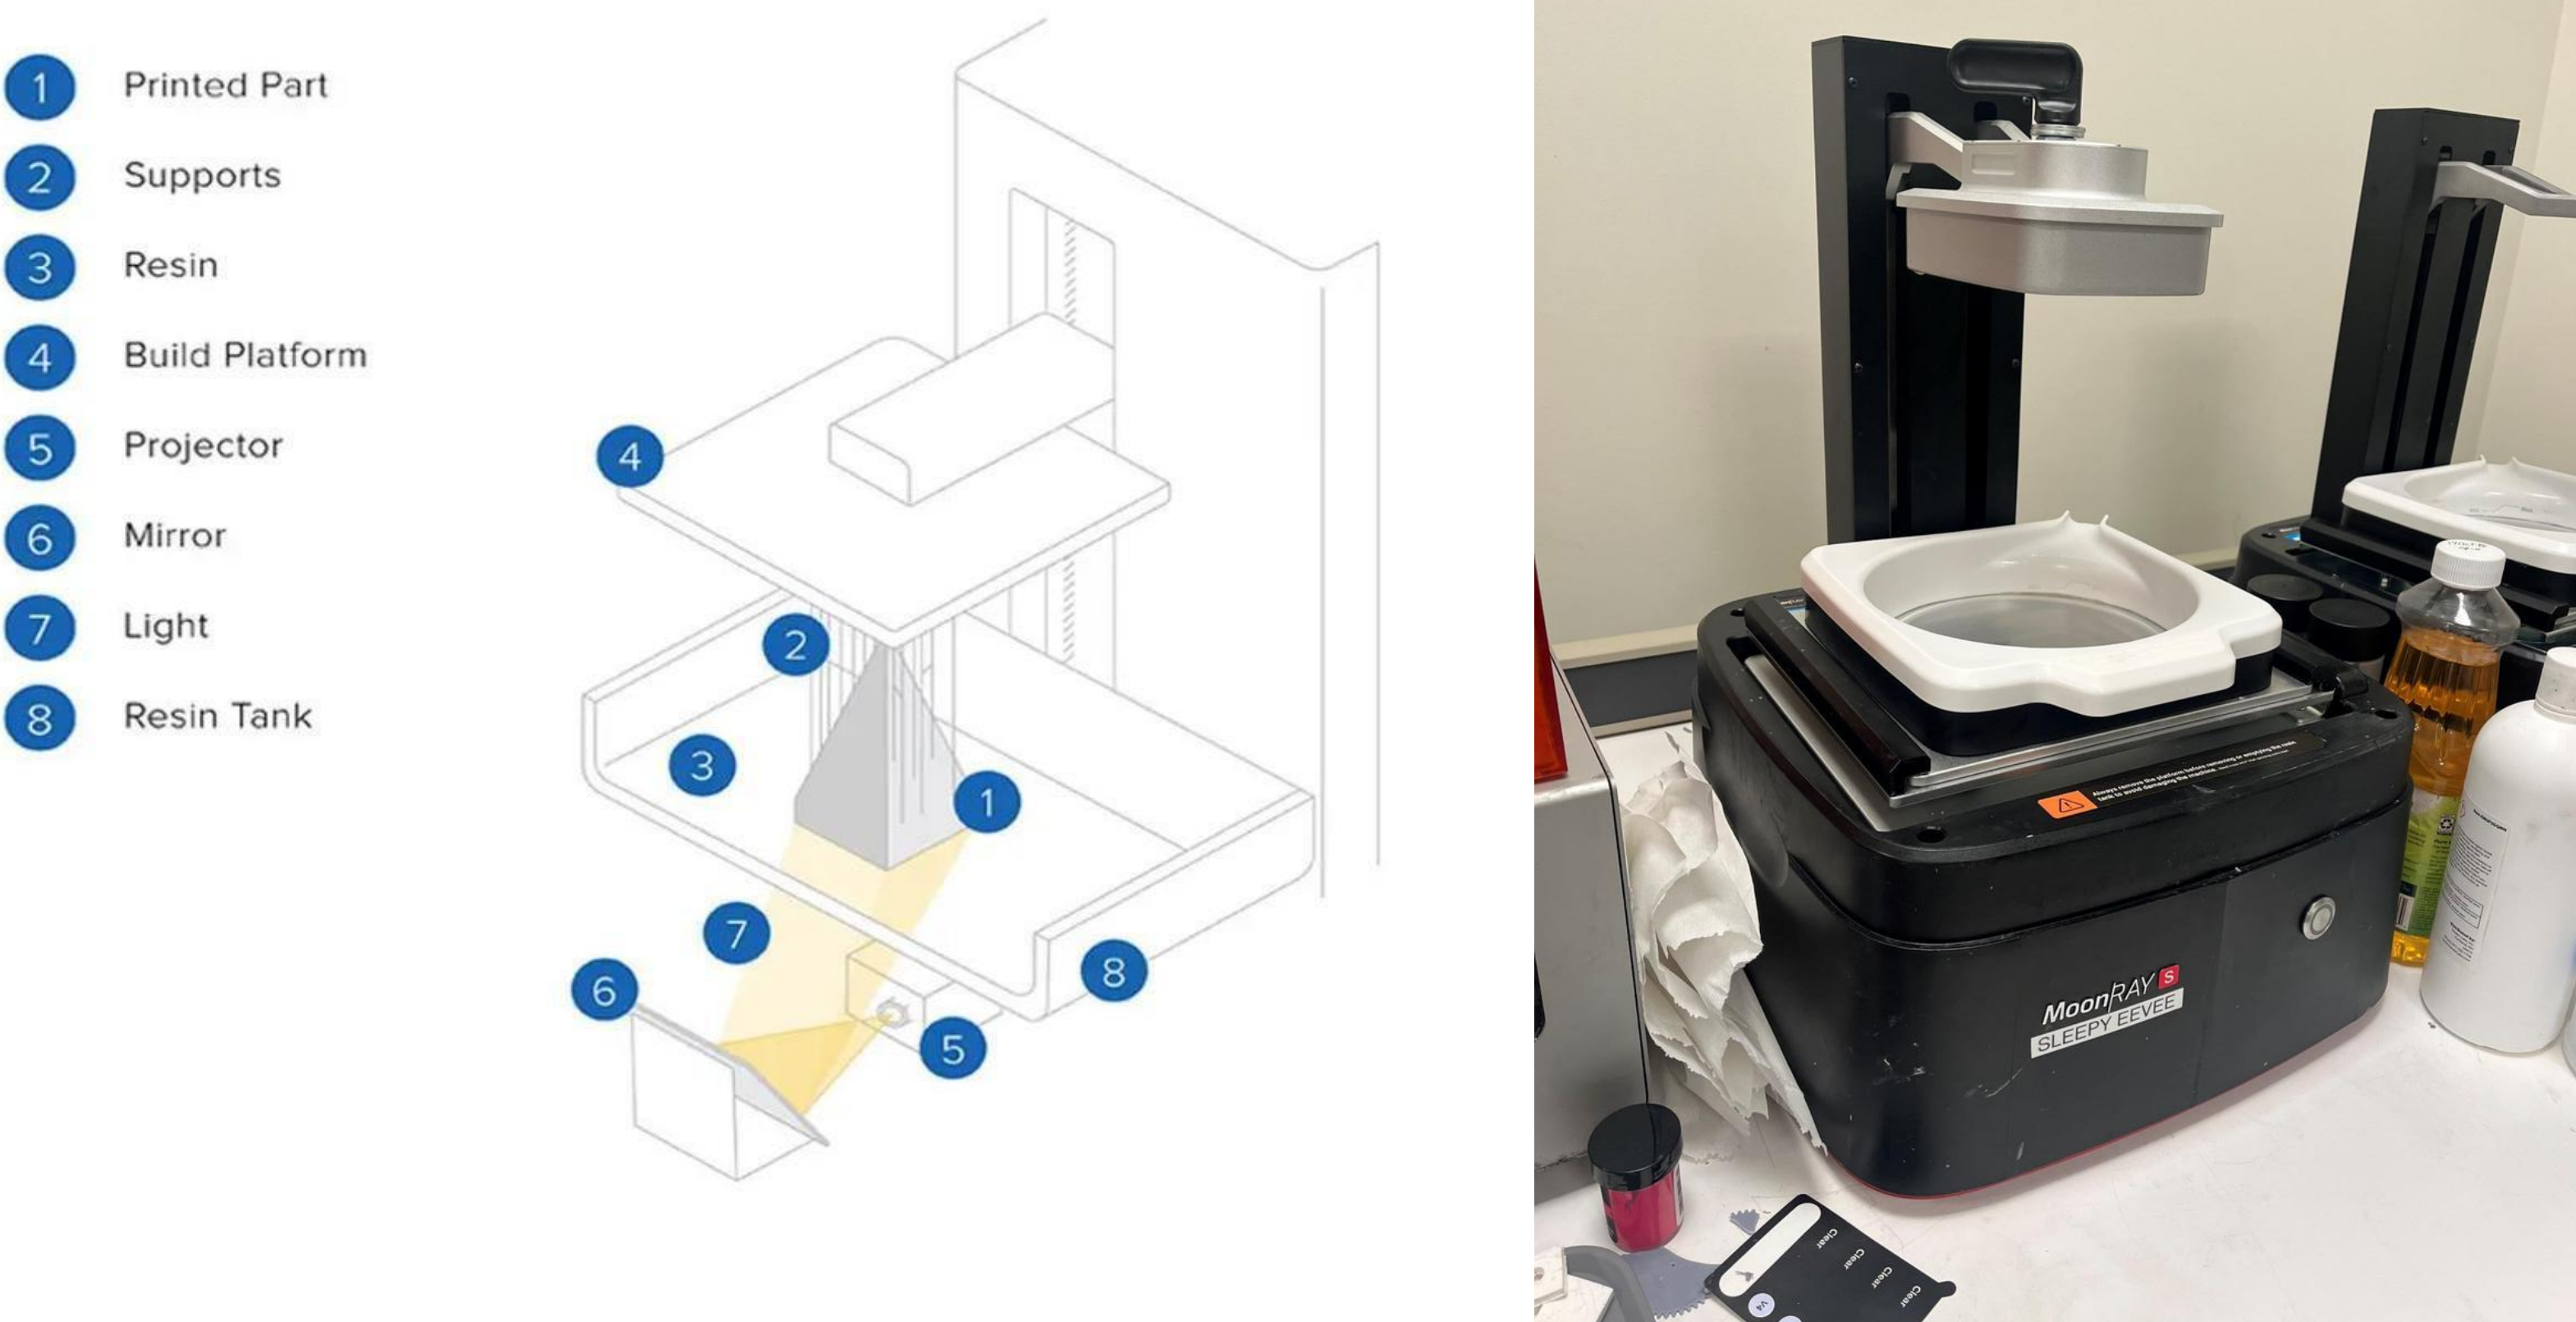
Exploded view of DLP resin printer (left) and MoonRay DLP Resin printer (right).
